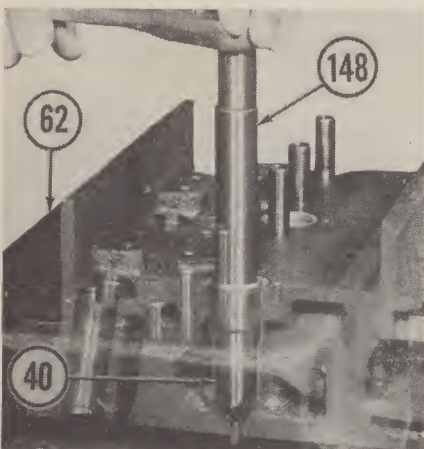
A—GM engine. Reaming bevel seat in injector tube for the injector nut with GM tool J 5286-9.
